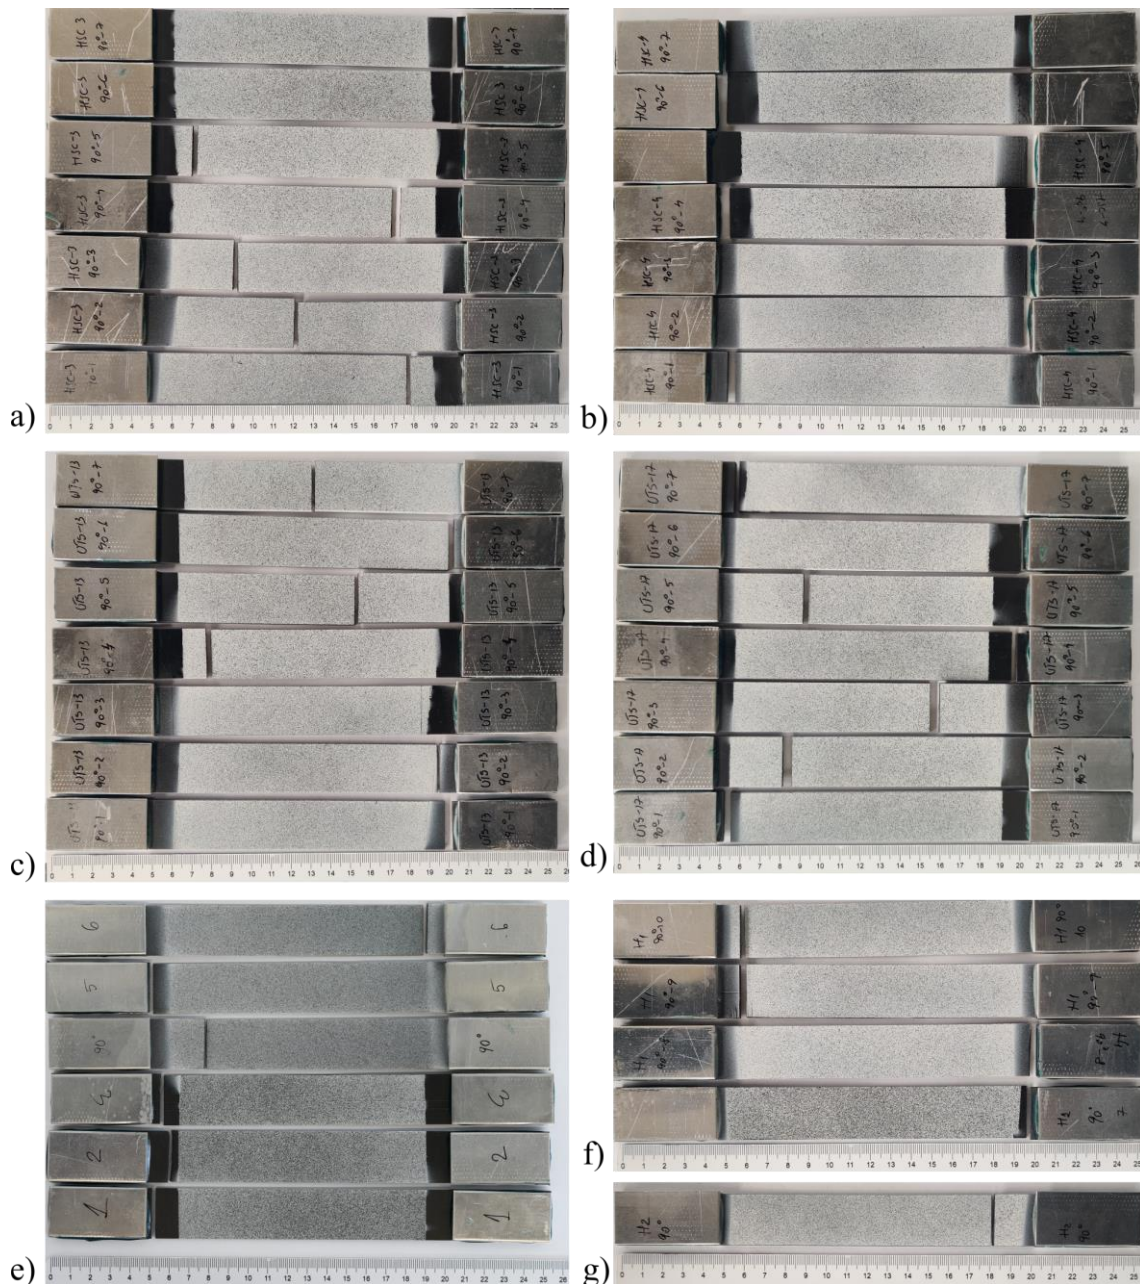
Fracture position for 90° samples, with sample 1 starting from the ruler; a) HSC3; b) HSC4; c) UTS13; d) UTS17; e) H1 (Samples 1-6); f) H1 (Samples 7-10); g) H2
